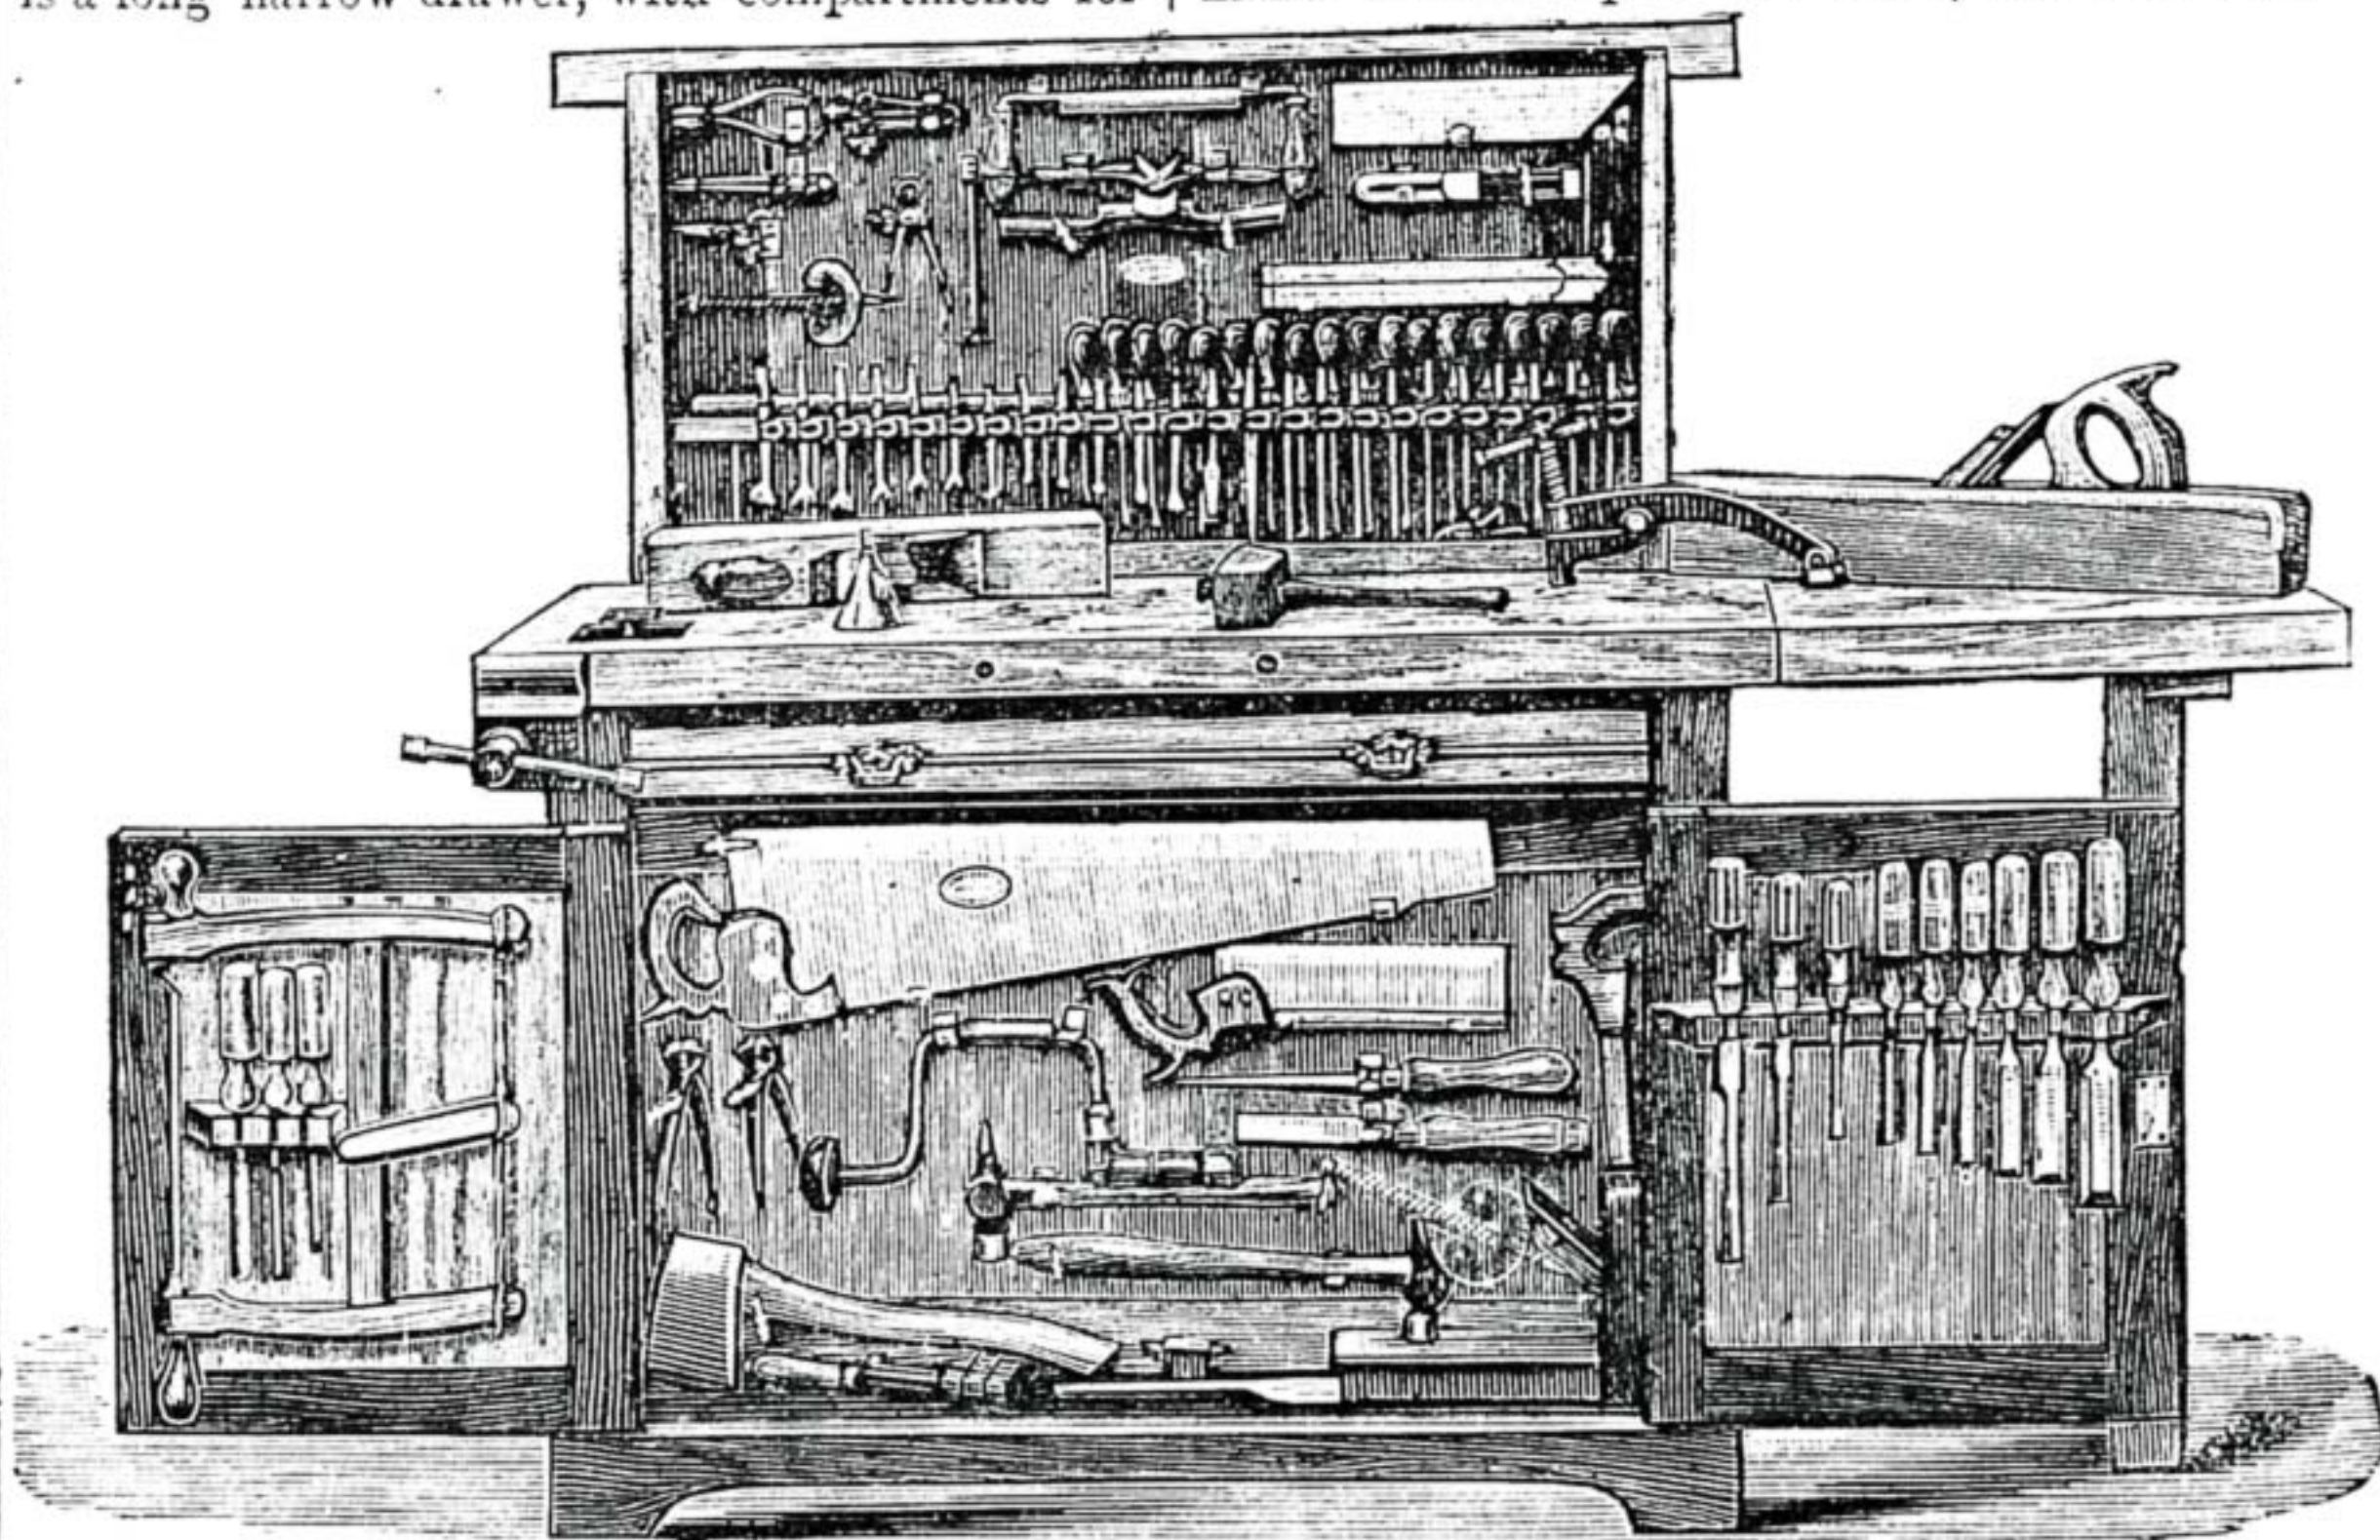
Moseley's "Compactum" Tool Cabinet open, showing Storage of Tools and Extension of Bench.
